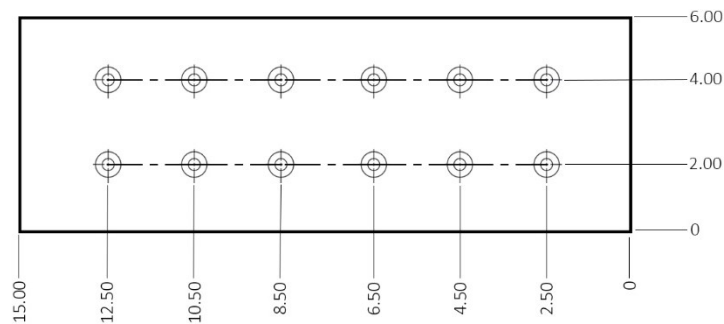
Hole pattern of all coupons used during testing. A total of 12 equally spaced holes were drilled into a 0.19" thick Aluminum sheet.
